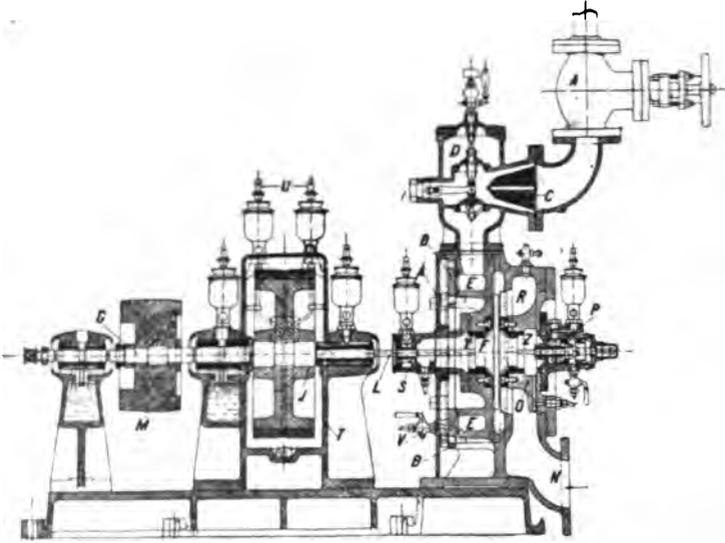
300 B.H.P. “ DE LAVAL ” STEAM TURBINE MOTOR.
